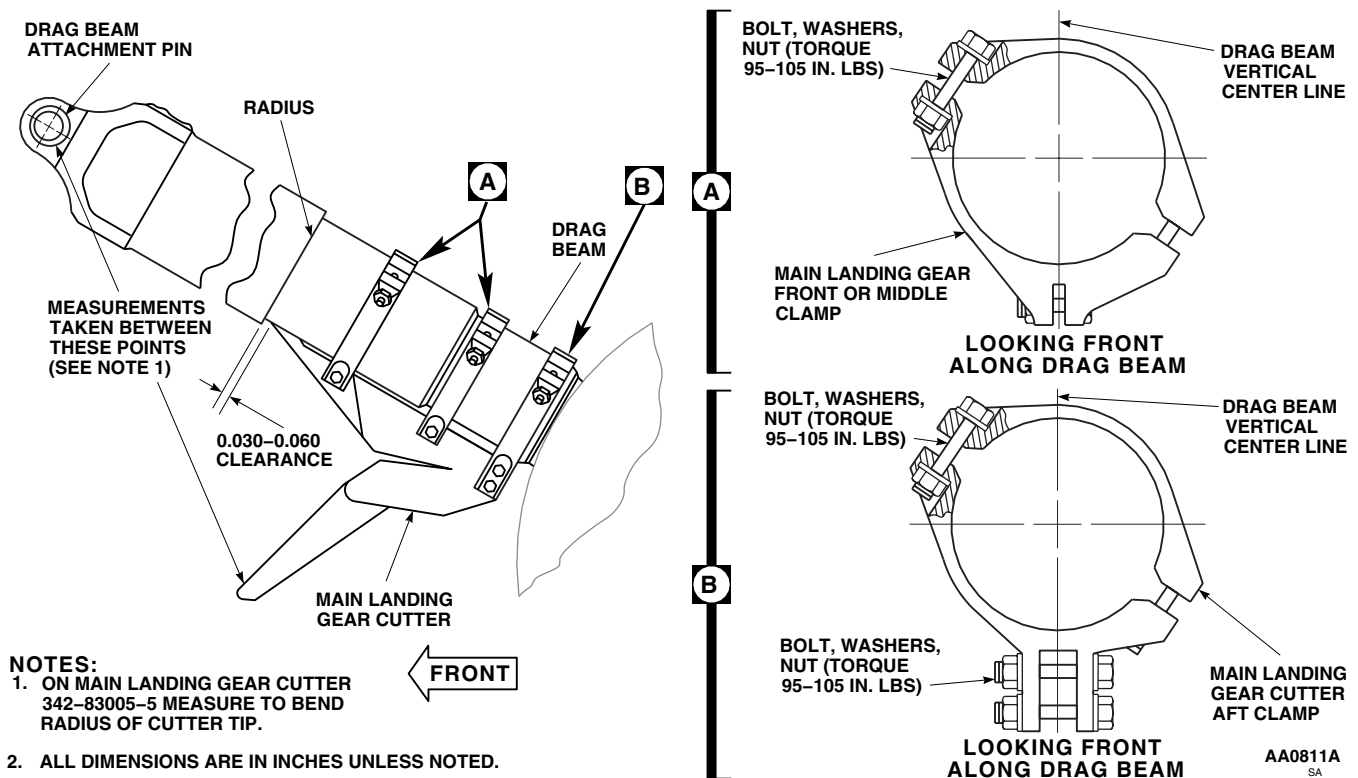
Replace Wire Strike Main Landing Gear Cutter Clamp.
